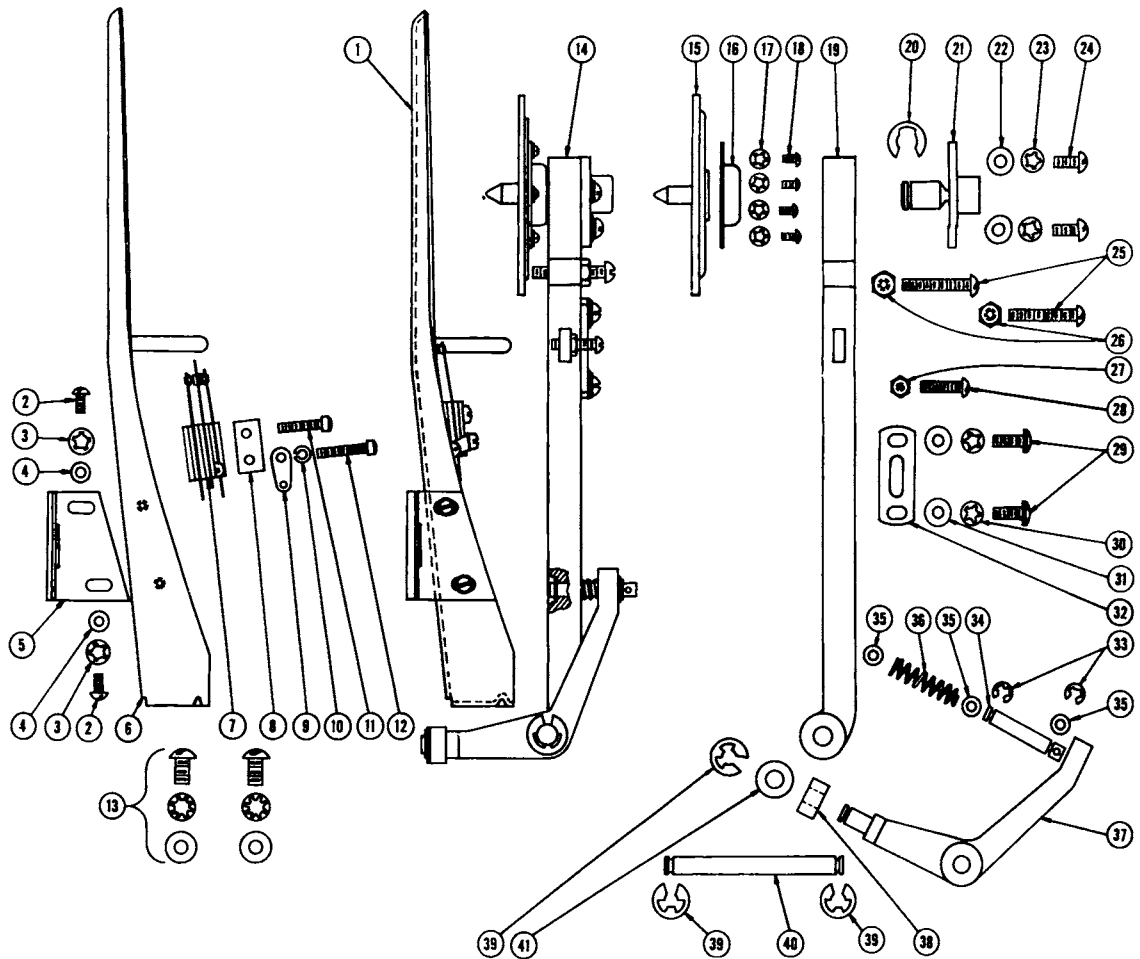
CLAMP ARM & STRIPPER PLATE
